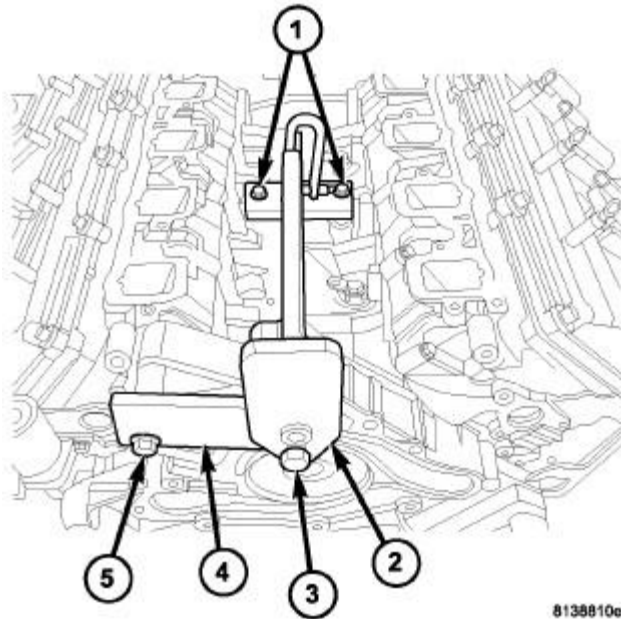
ENGINE LIFT FIXTURE and ADAPTER
